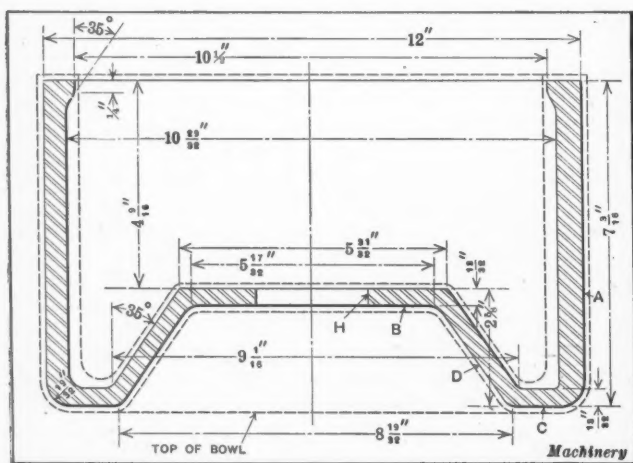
Cream Separator Bowl finished on the Exterior on Machine shown in Fig. 2
